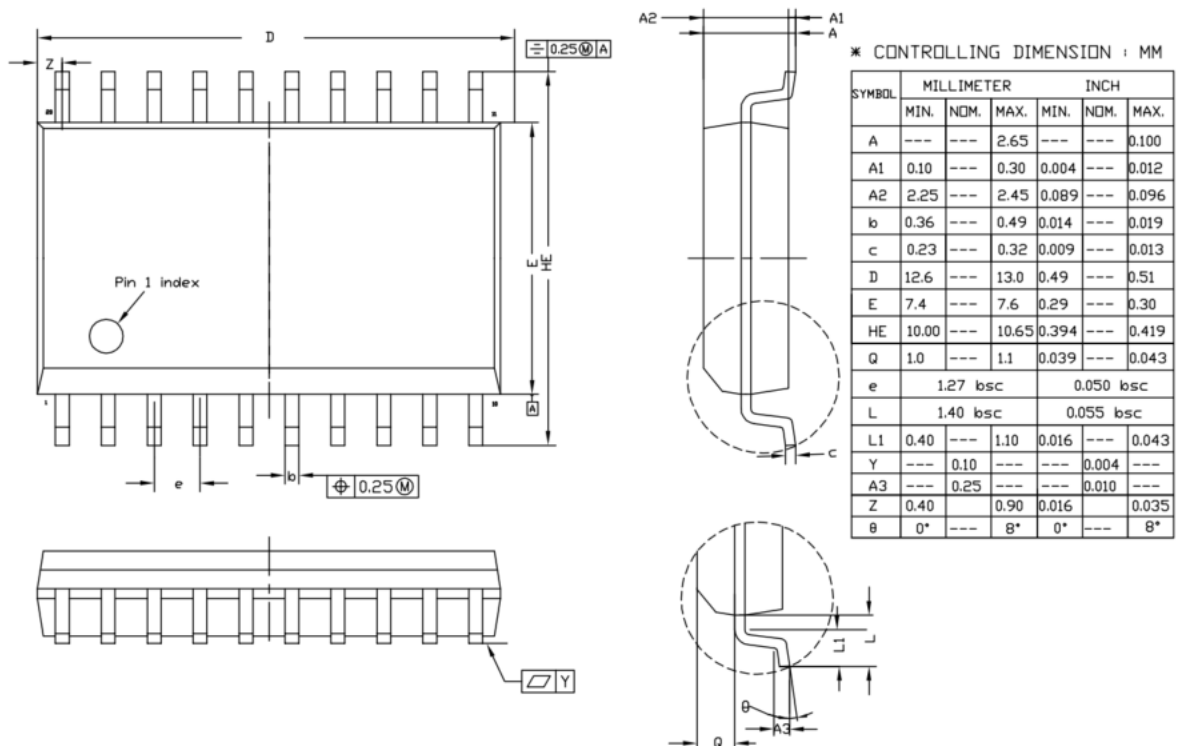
SOW20 Package Shape and Dimension in millimeters
